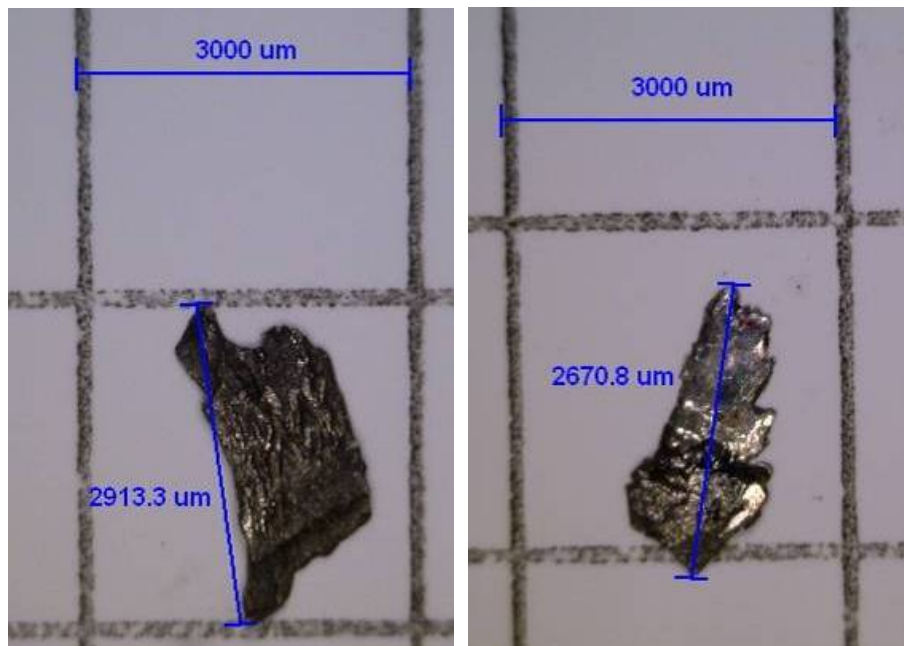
The two large rolling contact fatigue spalls captured from a helicopter gearbox incipient failure and used to simulate the large rolling contact fatigue chips condition for the F117-PW-100
